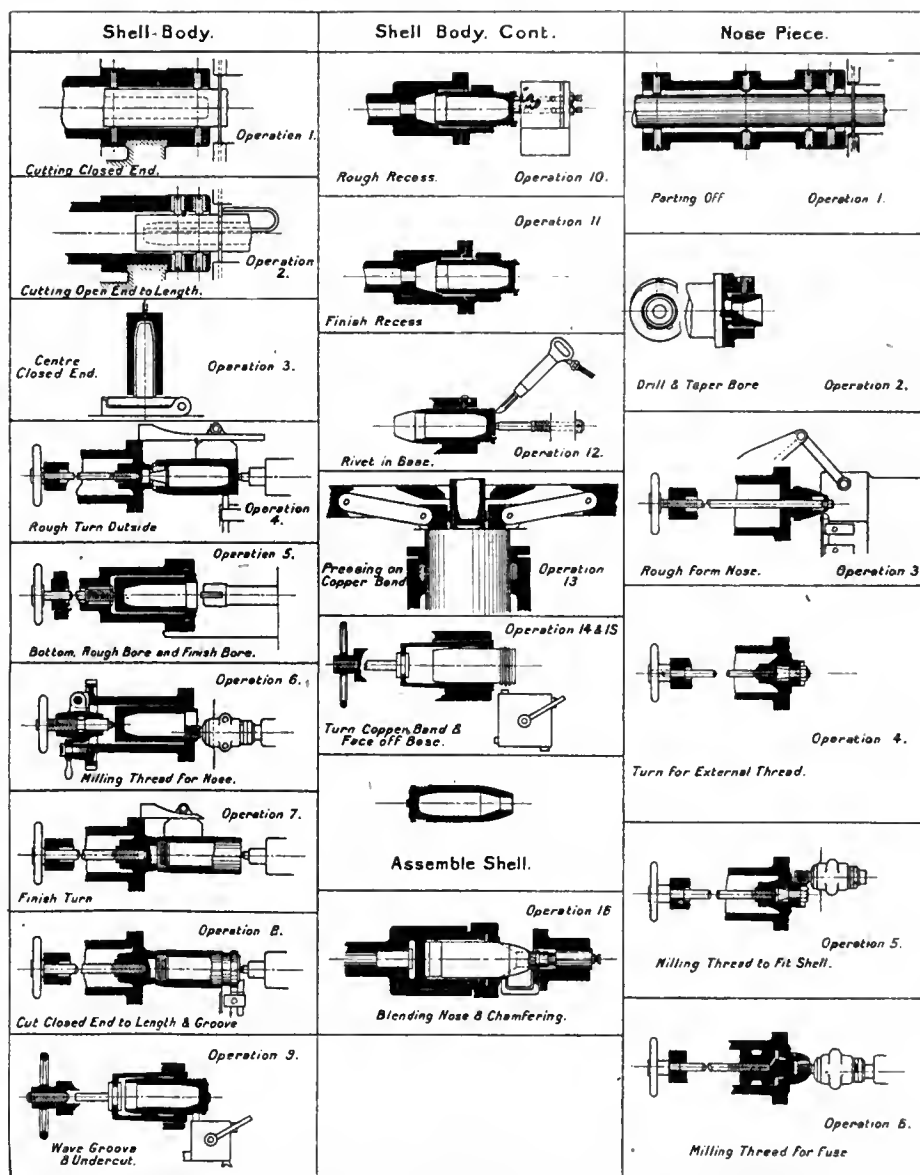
MACHINING PROCESSES FOR SHELL BODIES AND NOSE PIECES.
